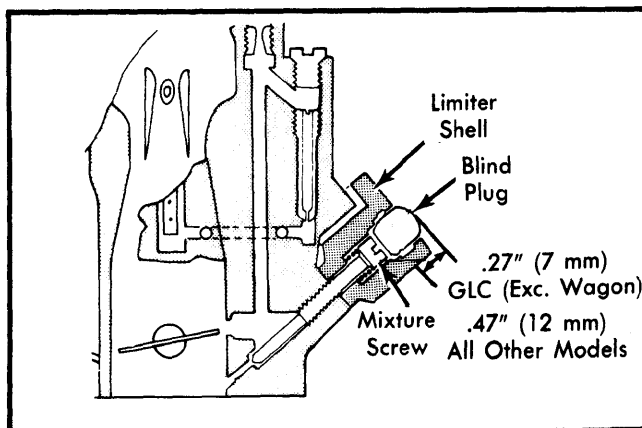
Idle Mixture Limiter Shell and Blind Plug on Carburetor
